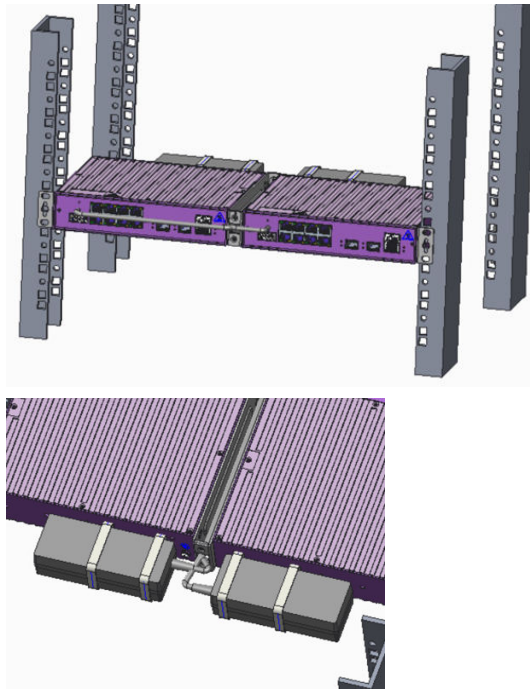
V300-8T-2X Dual Rack Mounting with PSU
